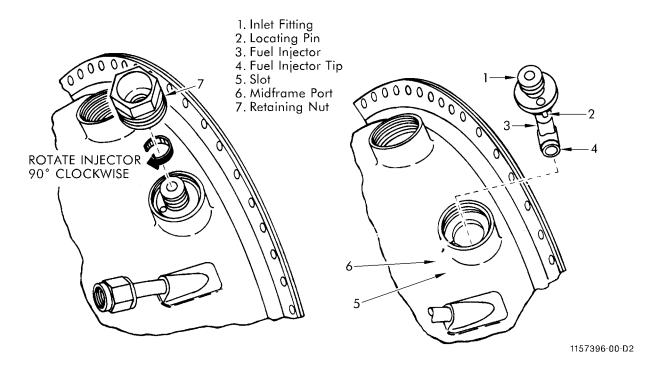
Fuel Injector Assembly; Removal and Installation
